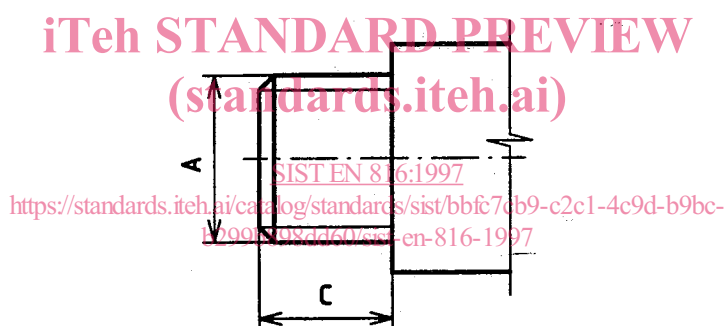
Threaded inlets of taps with visible body for mounting on vertical surfaces
